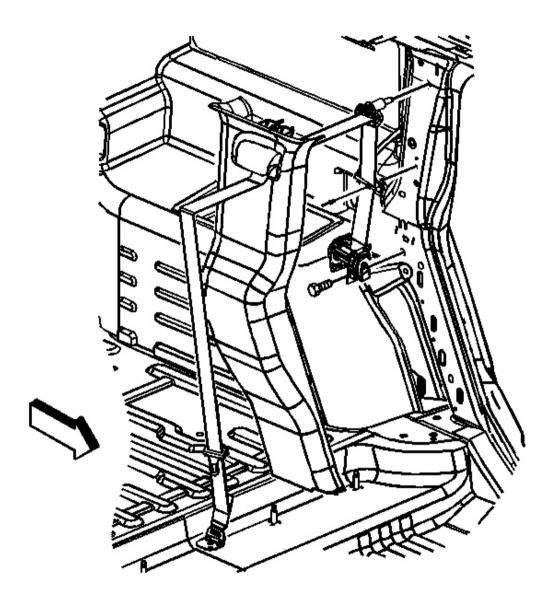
Upper Guide Bolt Courtesy of GENERAL MOTORS CORP.
